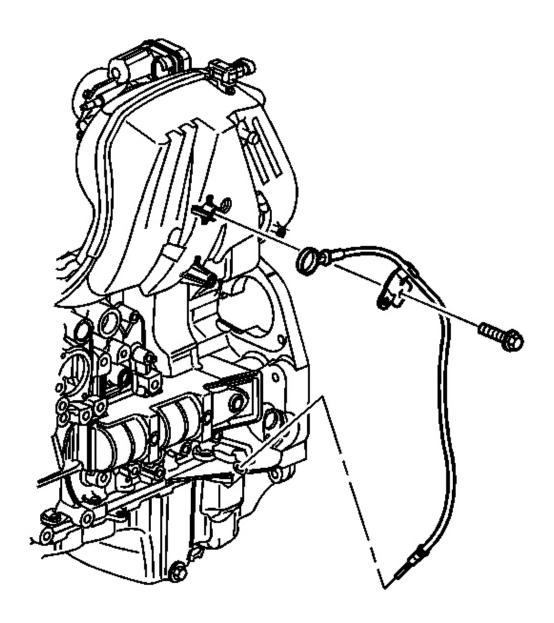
View Of Oil Level Indicator Tube Courtesy of GENERAL MOTORS CORP.
